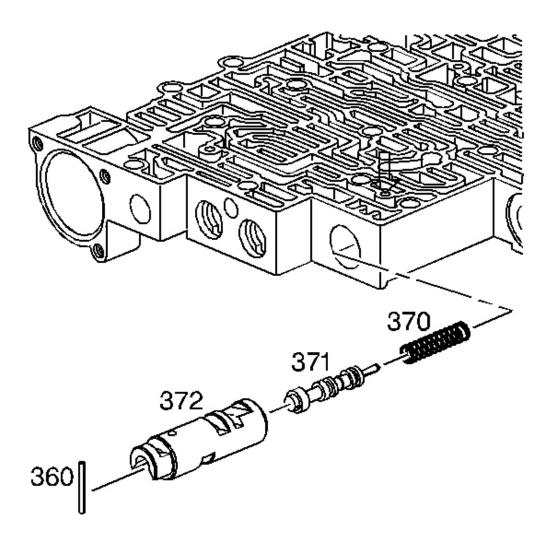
View Of 1-2 Accumulator Valve & 1-2 Accumulator Valve Sleeve Courtesy of GENERAL MOTORS CORP.
